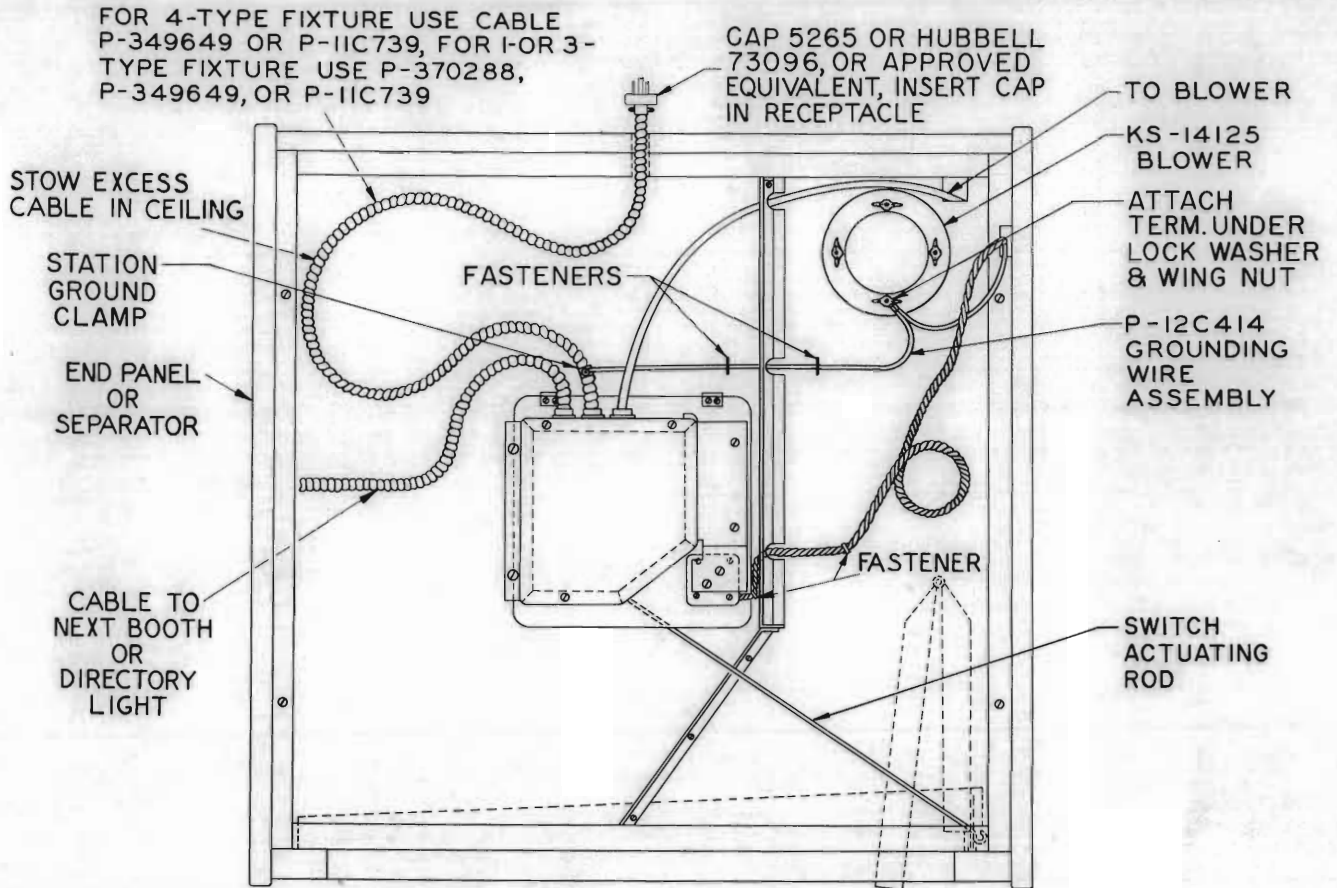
11-Type Booth Ceiling, Roof Removed
